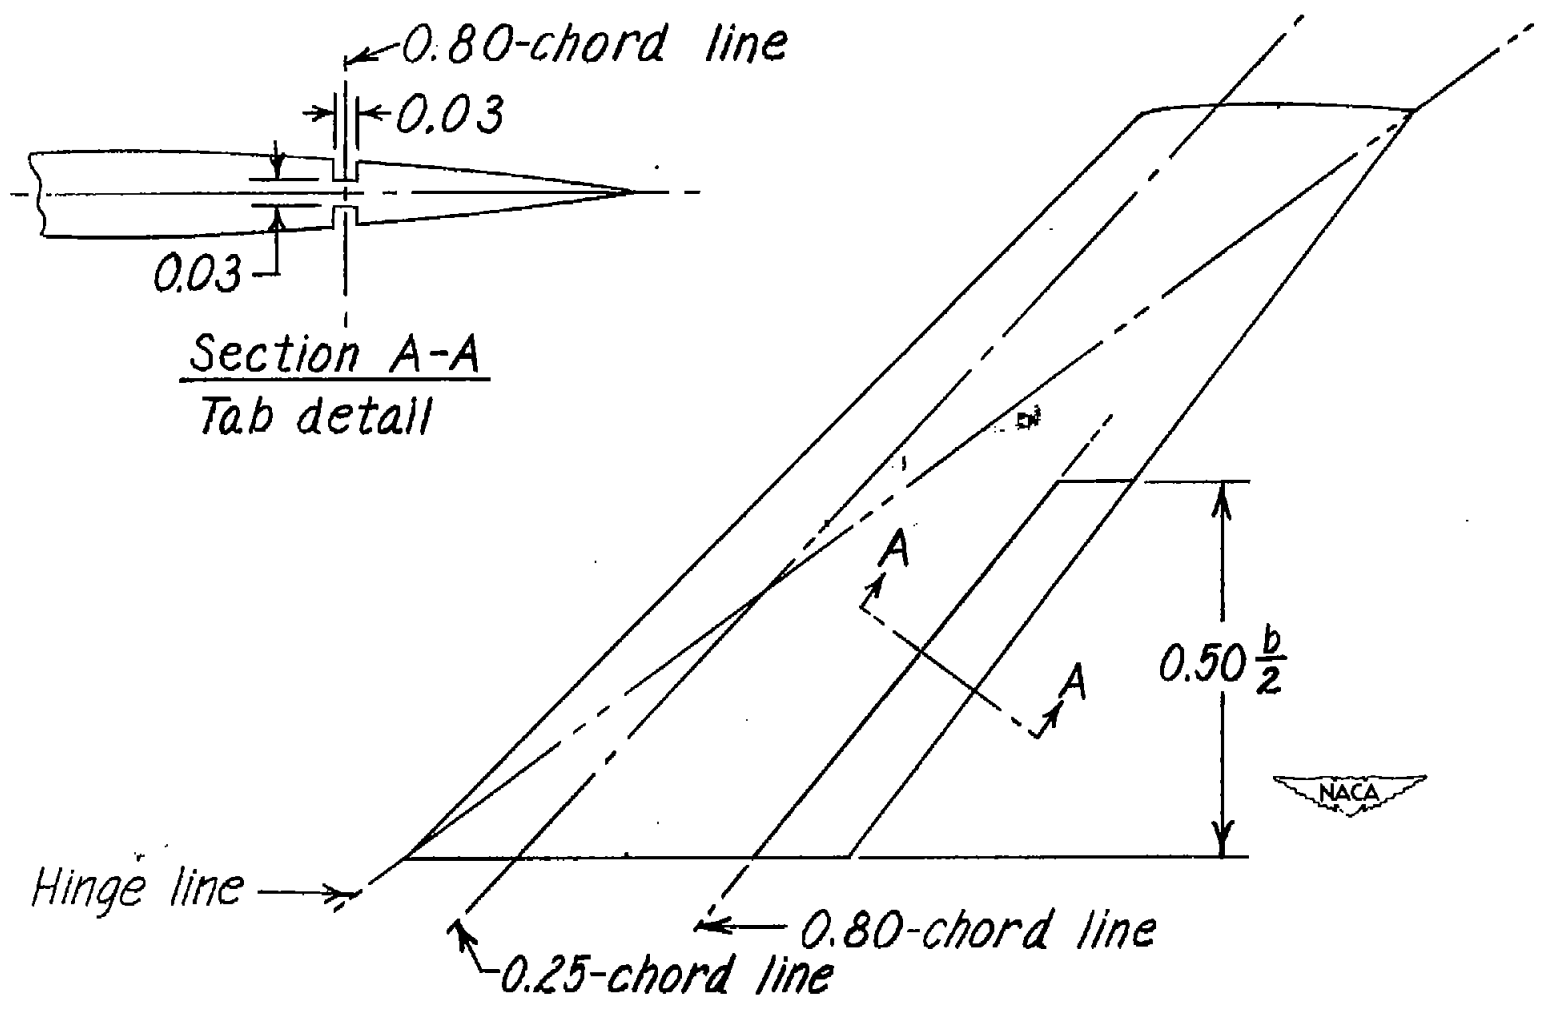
Location and dimensions of the inset tab investigated on the all-movable tail. All dimensions in inches unless otherwise noted.
